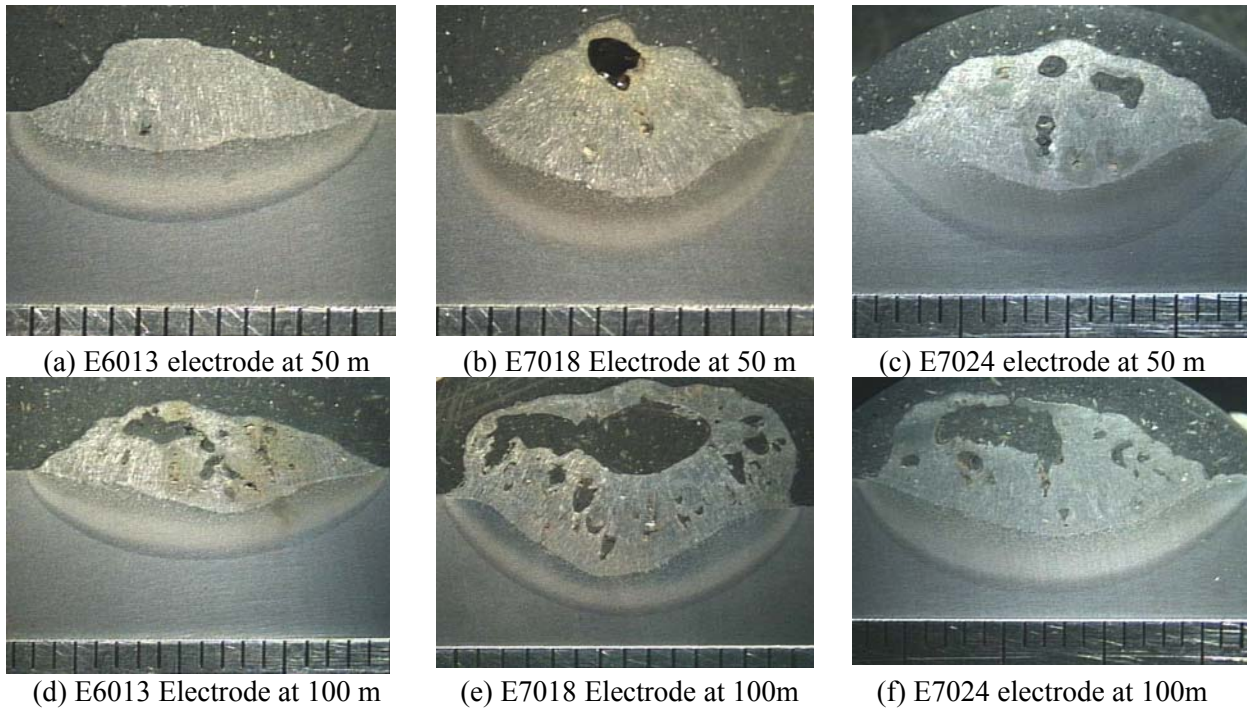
Cross-section macrographs from the center of the BOP wet welds deposited using electrode positive with the E6013, E7018 and E7024 electrodes at 50 and 100m.
